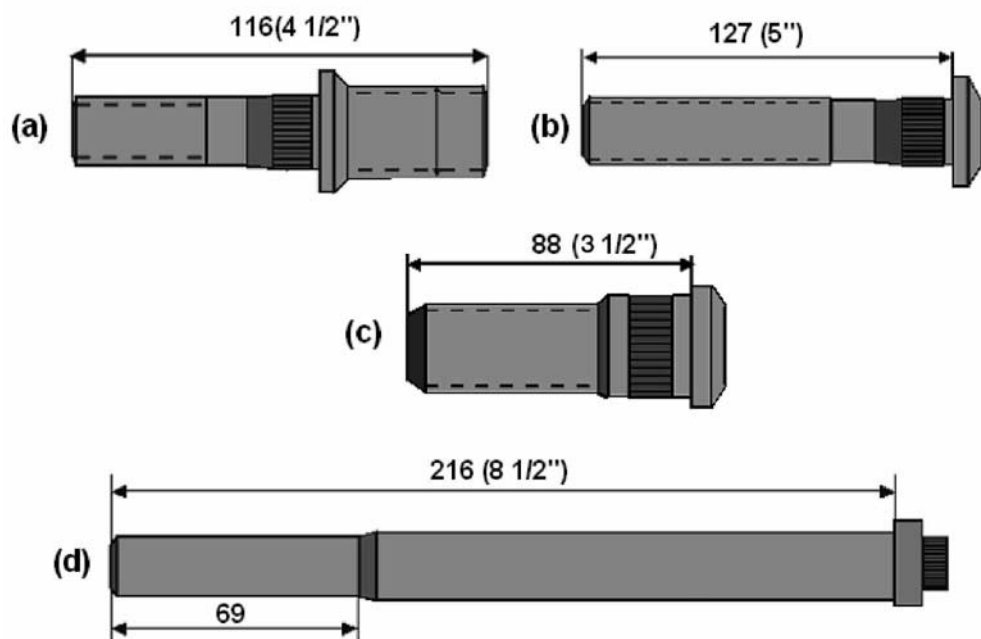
Tested fasteners: (a) 4140 steel bolt of type 1; (b) 4140 steel bolt of type 2; (c) 1340 steel bolt of type 3; (d) cylinder head bolt sketch.
